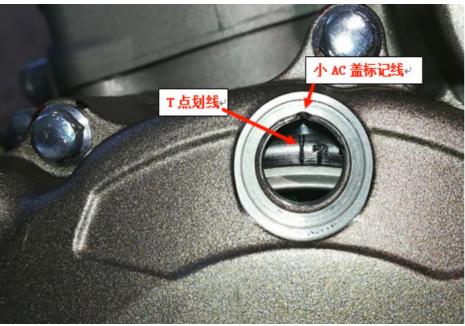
CYLINDER HEAD		Disassembly of camshaft-2	CHK	Q
